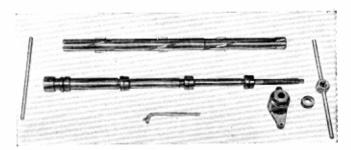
Camshaft Bearing Removing and Replacing Tools
